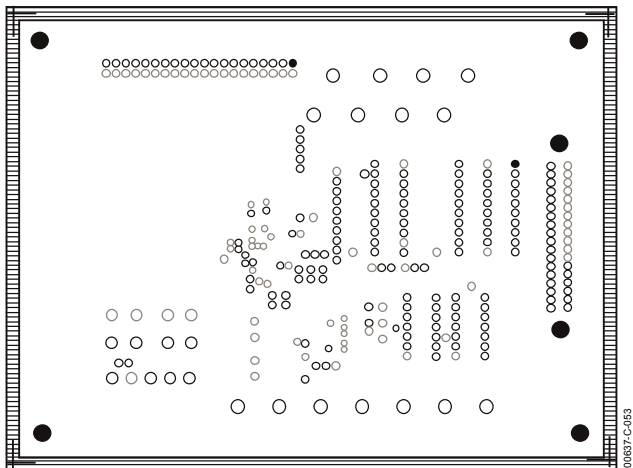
PCB Lay Out Pattern for Four-Layer AD9856 PCB Evaluation Board Layer 2—Ground Plane
